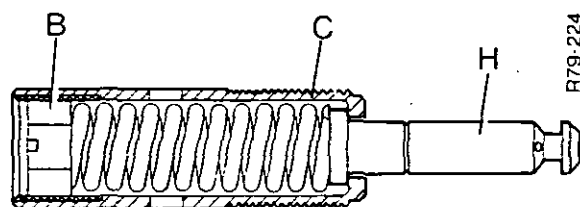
ASSEMBLY OF THE FLOW VALVE
